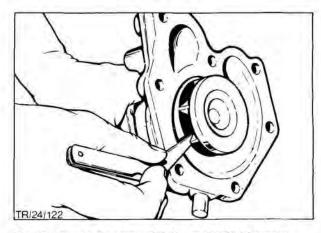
Ensure a clearance of 0,76 mm (0,030 in) at point indicated
